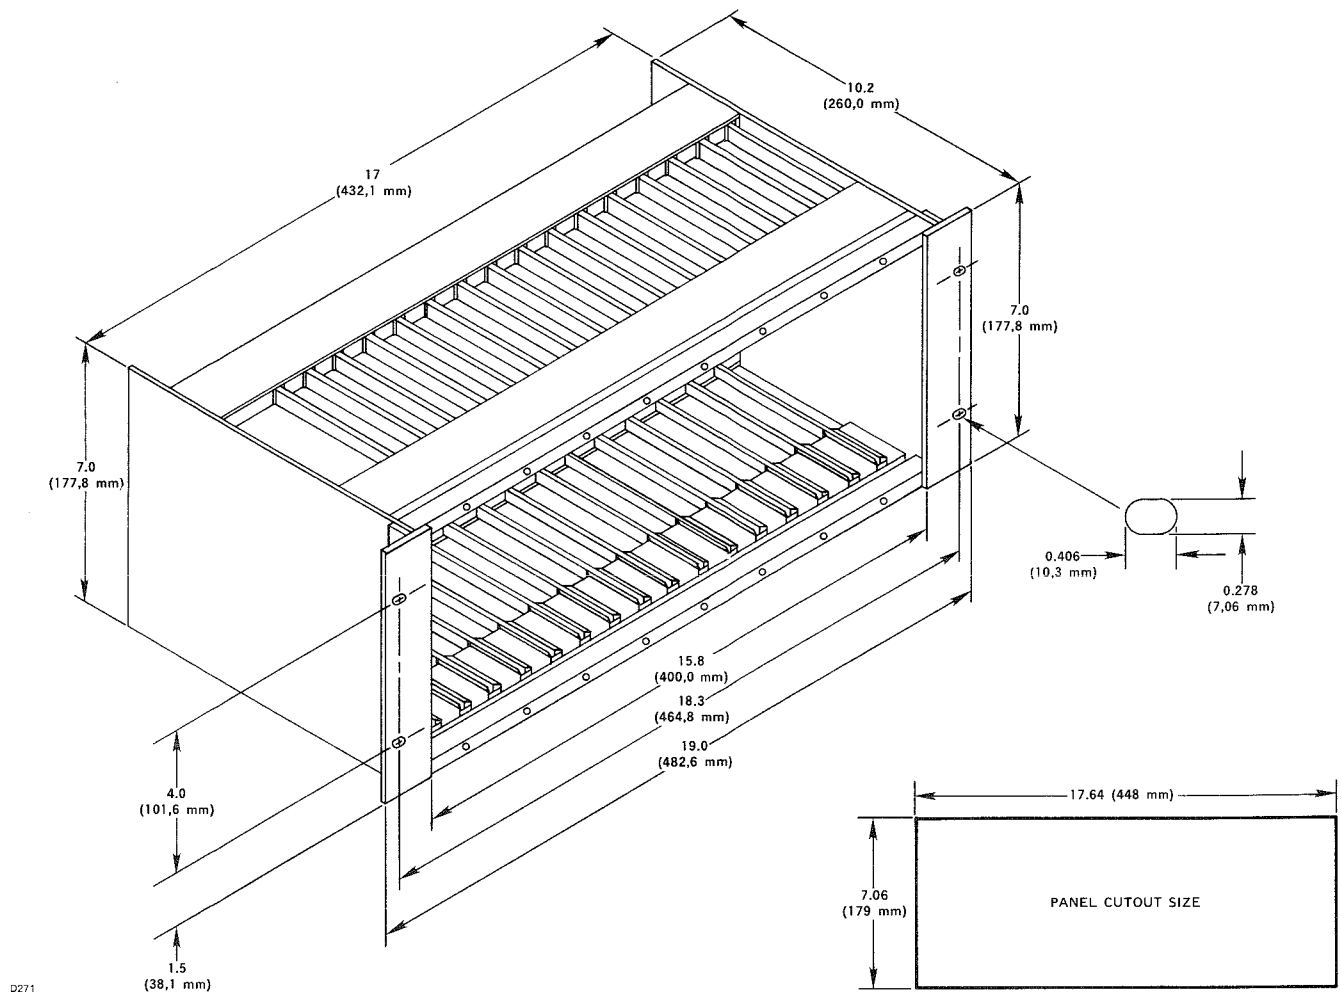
Q4004 Mounting Cage Dimensions in Inches (Millimeters)
